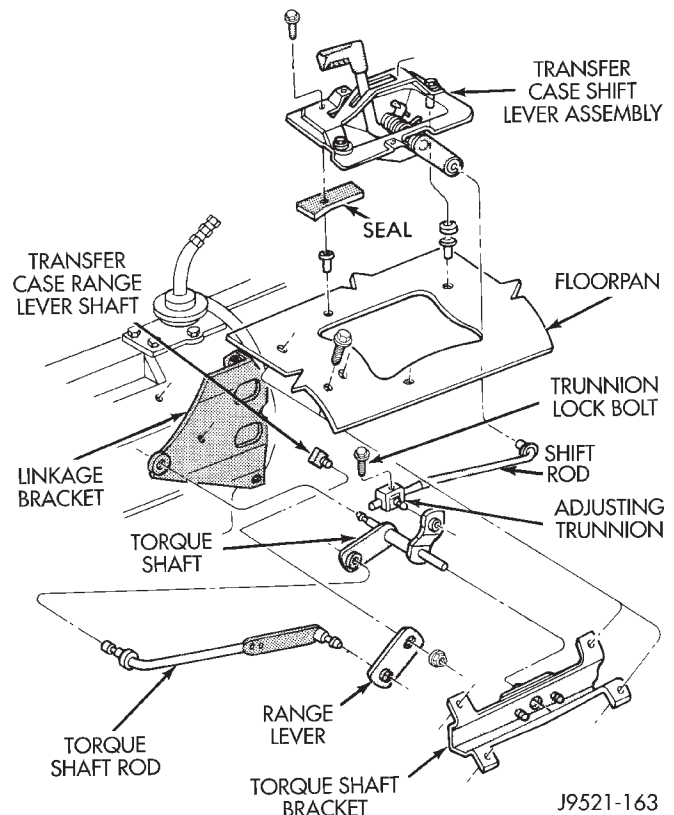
Adjusting Trunnion And Lock Bolt (YJ)
